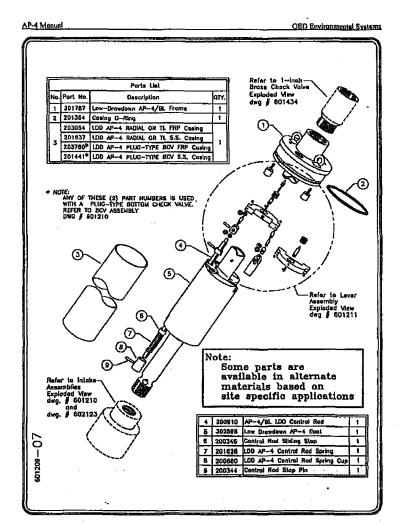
Exploded View of LDD Bottom-Loading AutoPump AP-4
